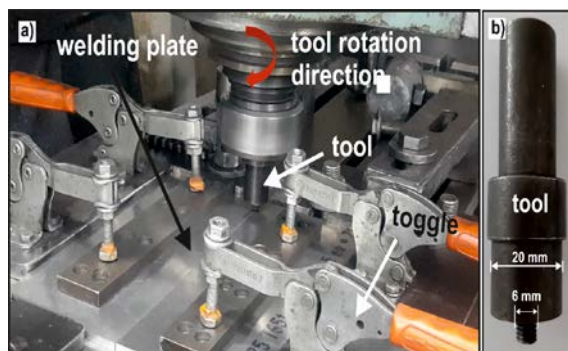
(a) Friction stir welding components; (b) Tool.
